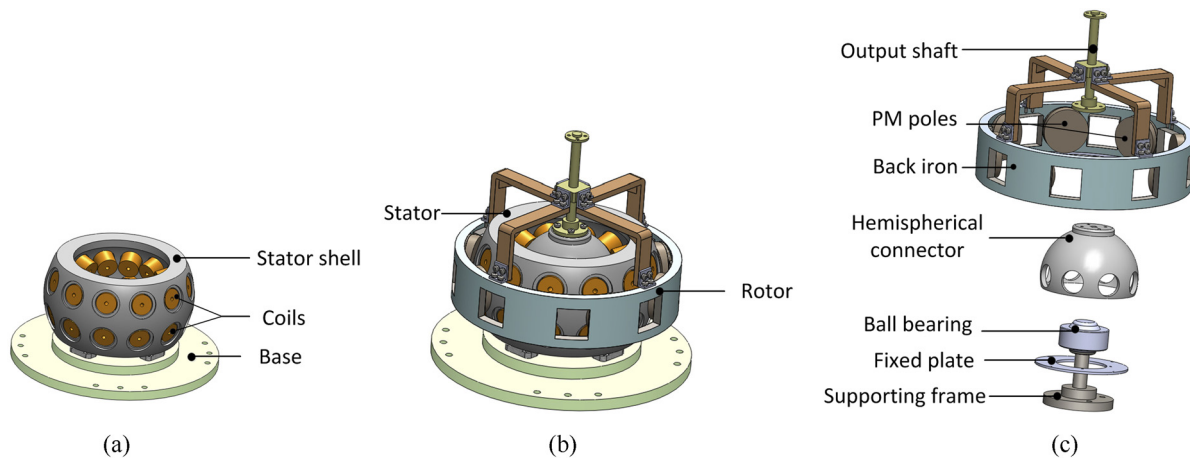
Structure of the spherical actuator: (b) overview construction; (a) the stator and (c) exploded view of the rotor.
